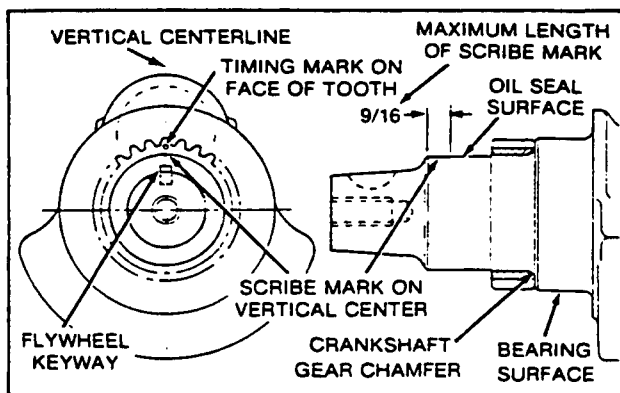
CRANKSHAFT GEAR ASSEMBLY
